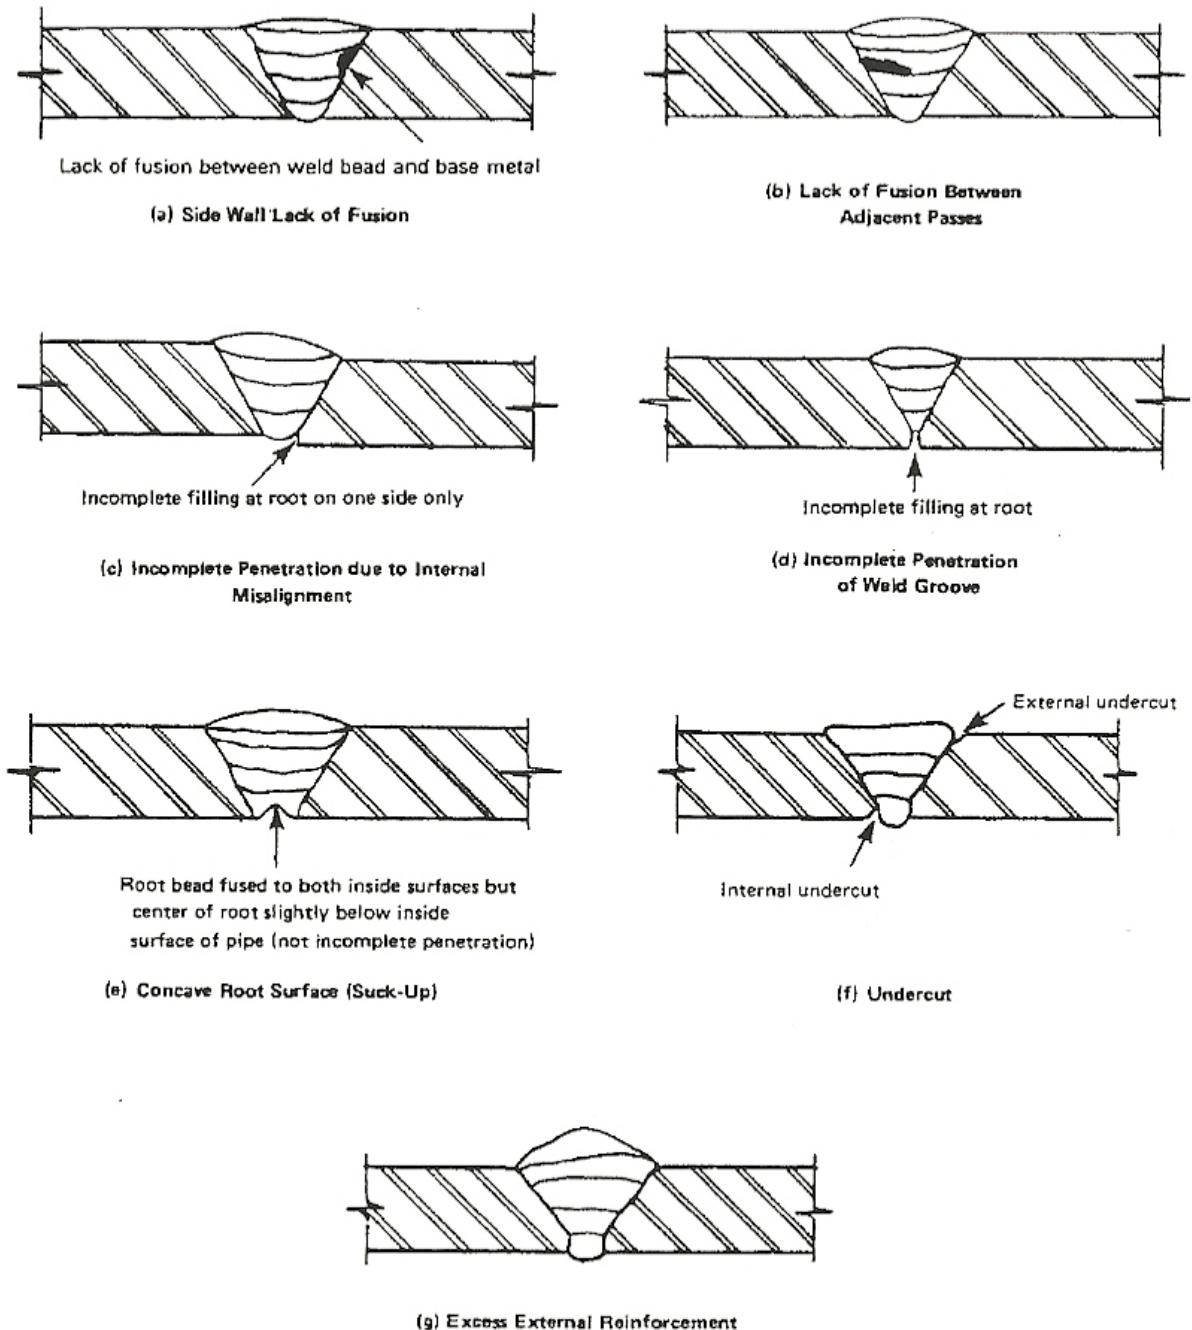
TYPICAL WELD IMPERFECTIONS
